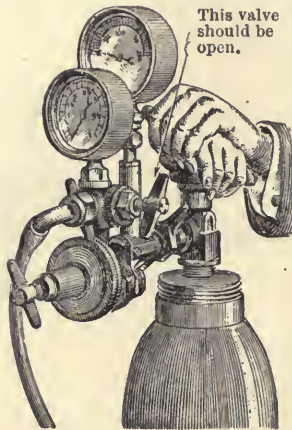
The valve on the oxygen cylinder should be opened very slowly.
